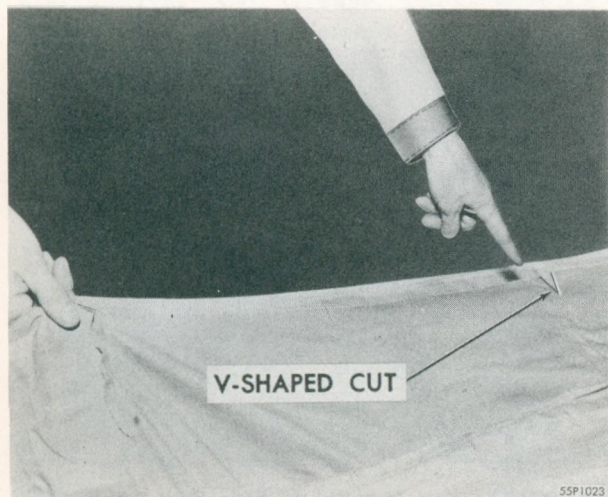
Marking Headlining with Small V-Shaped Cuts
